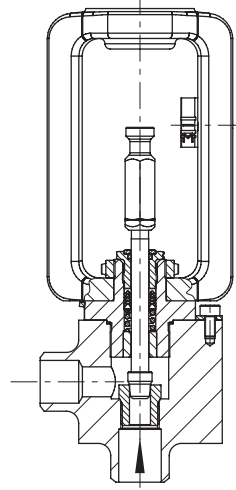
· Type 3252 High Pressure Valve as angle-style valve with welding ends
